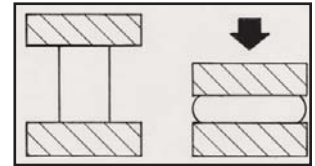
Open die forging of disk shapes involves progressive upsetting/forging to reach desired dimensions. Pierced disks are often used as preforms for saddle/mandrel rings and hollow forgings.
